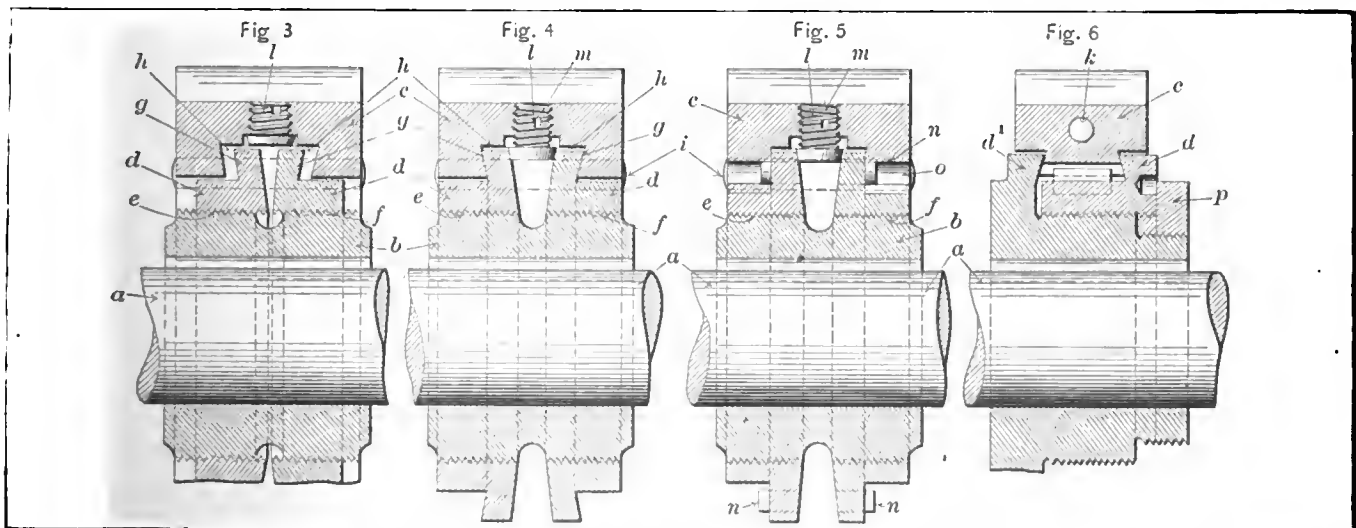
Section through gear and shaft showing locking ring before expanding. Fig. 4—Same section showing the ring expanded so as to clutch the gear to the shaft, the taper ended set screw to prevent backing off being down into position. Fig. 5 and Fig. 6—Show two alternate methods of constructing the same device, one with an external taper instead of internal, the other with pins in a groove
